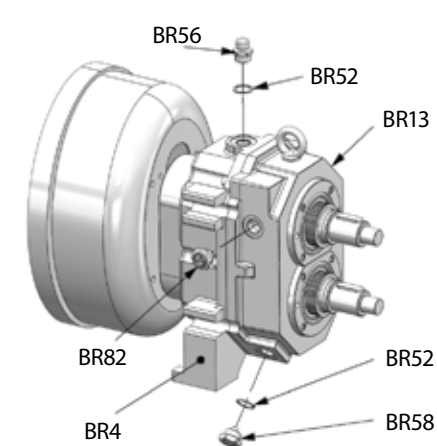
Disassembly of oil plugs before disassembling the seals.
